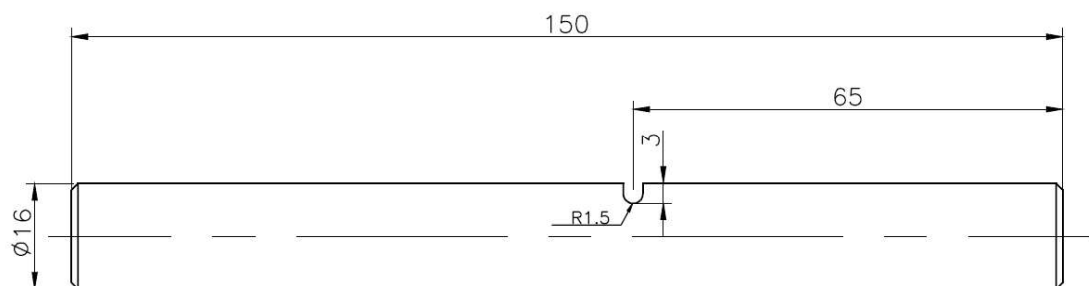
Shape and dimensions of DIN 34CrNiMo6 specimen with a lateral U-shaped notch. All dimensions are given in mm.
